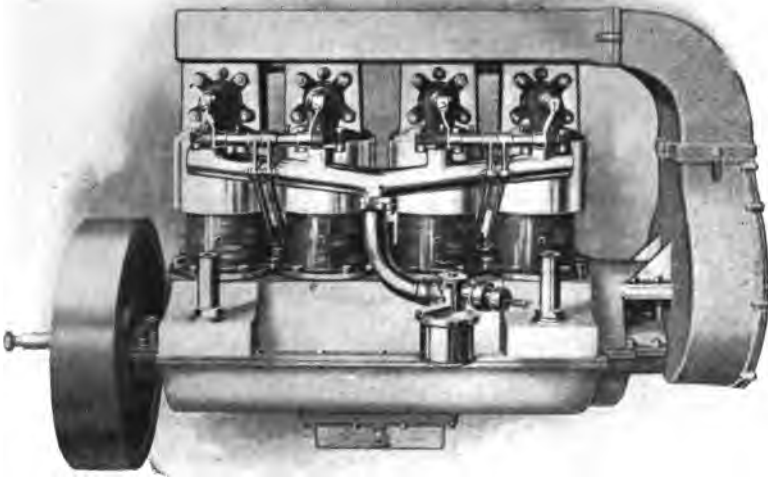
External View of Frayer-Miller Engine Cooled by Centrifugal Blower, Inlet Side. Oscar Lear Automobile Company, Columbus, Ohio.
